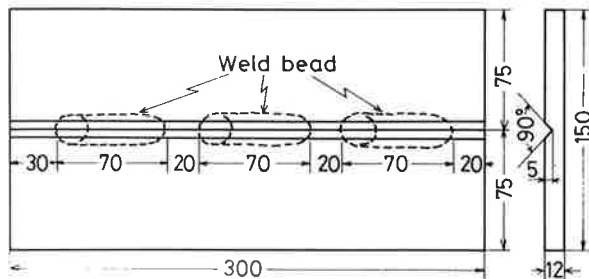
Shape and dimension of GMA weld crater cracking test specimen
